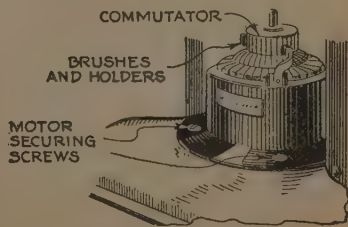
Cover and bearing support removed from a vacuum cleaner.
